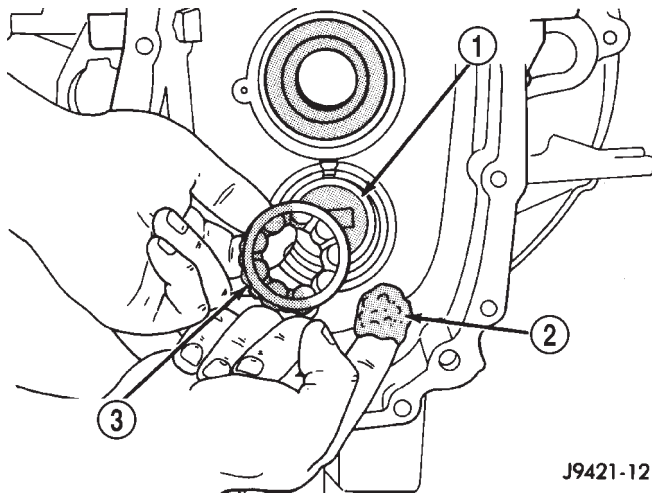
Input Shaft Bearing And Countershaft Front Bearing
